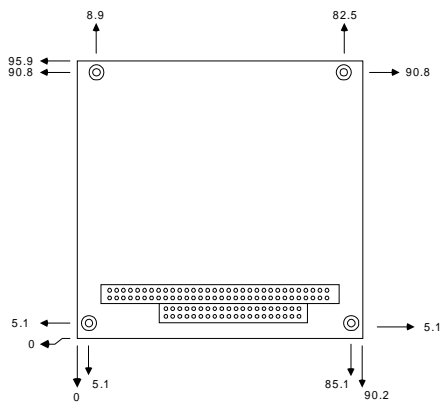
PC/104 module dimensions (mm) (± 0.1)
